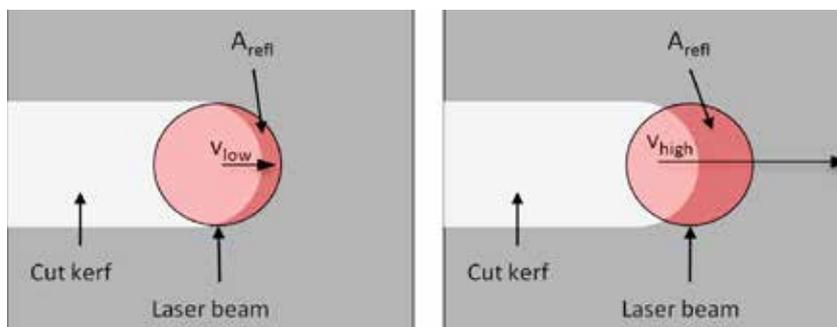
Top-view drawing of laser hitting workpiece at two different speeds.
